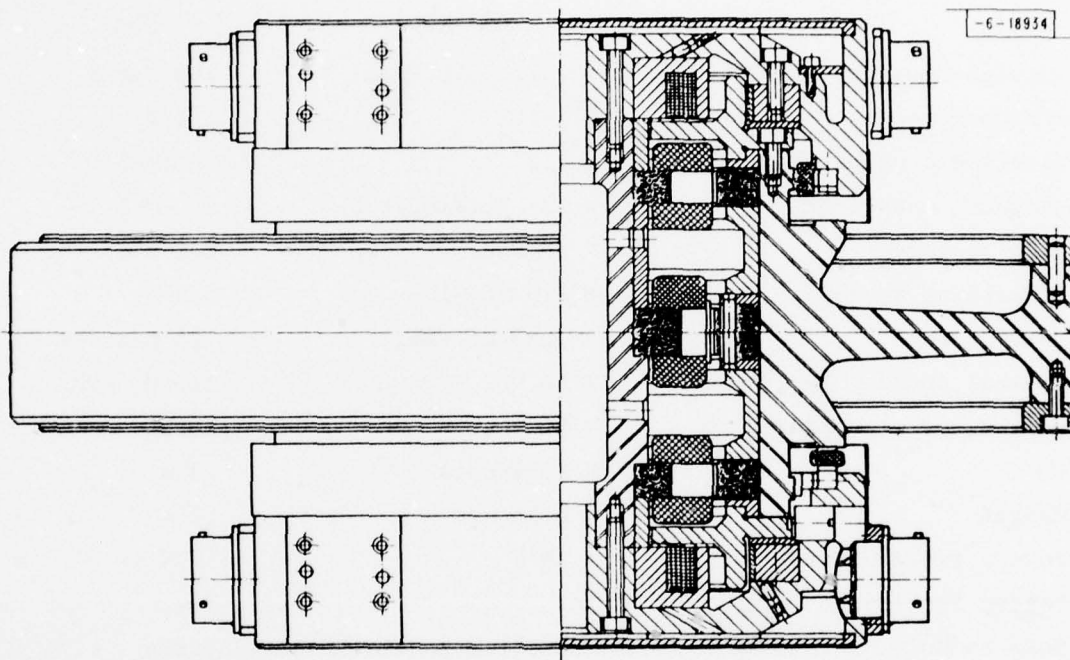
Magnetic bearing momentum wheel, type MDR.
